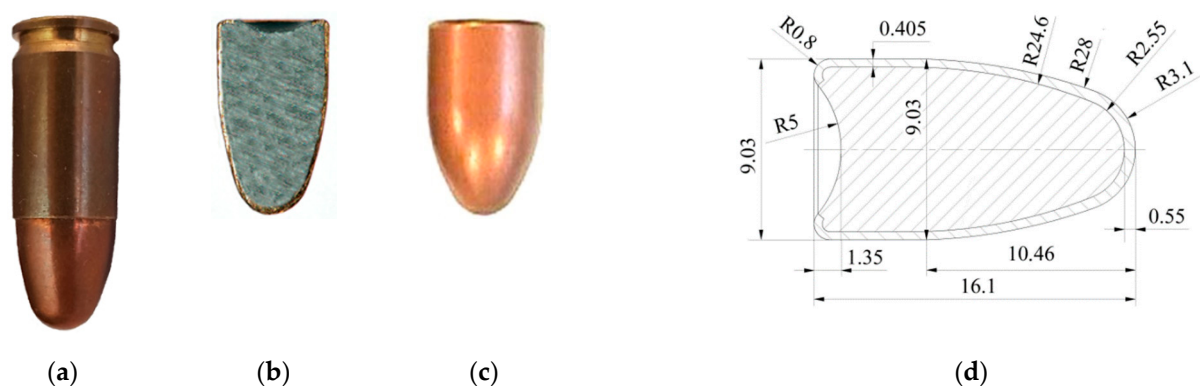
The 9×19 mm FMJ Parabellum bullet: (a) single cartridge; (b) projectile cross section; (c) projectile and (d) dimensions of projectile.
